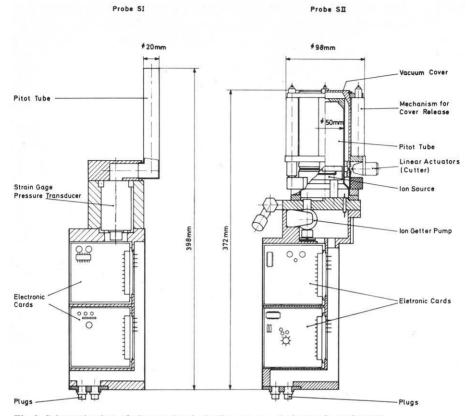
Schematic view of pitot probes including gages and electronic equipment
